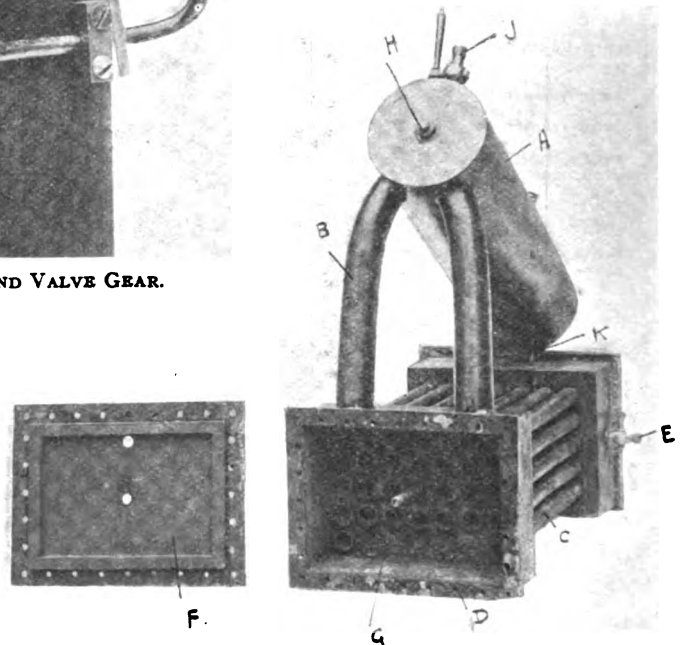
THE WATER-TUBE BOILER FOR MR. LANE'S TRIP VALVE ENGINE.
